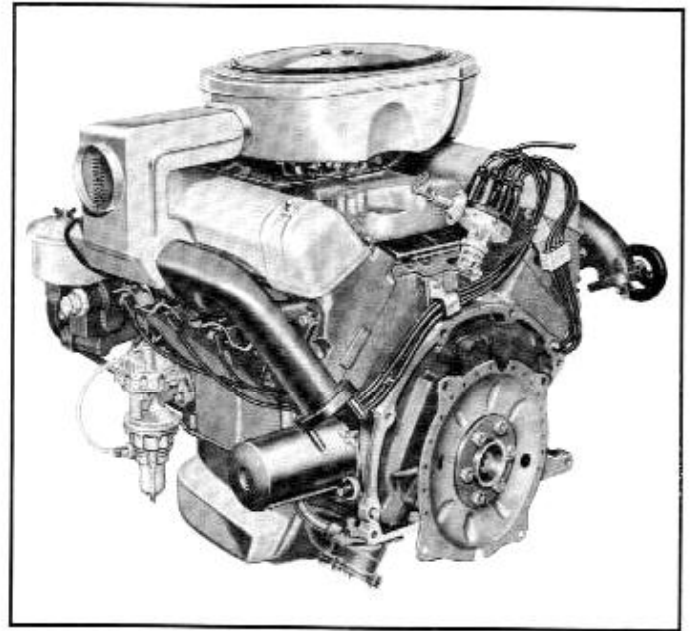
C-2—Left Rear 3/4 View — 368 Cubic Inch Engine
